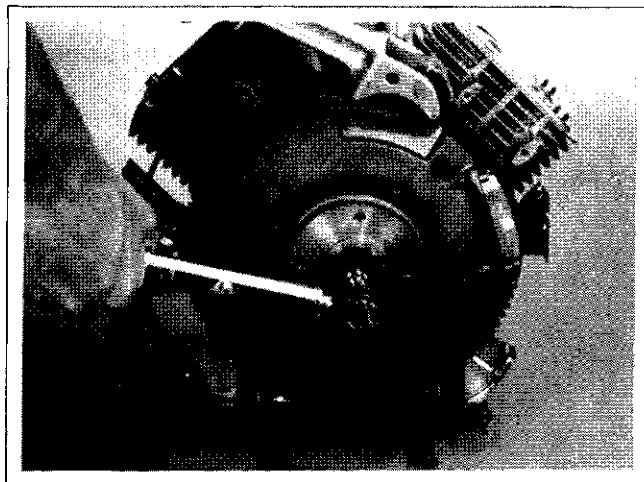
Hold Flywheel with a Strap Wrench While Torquing Fastener.
